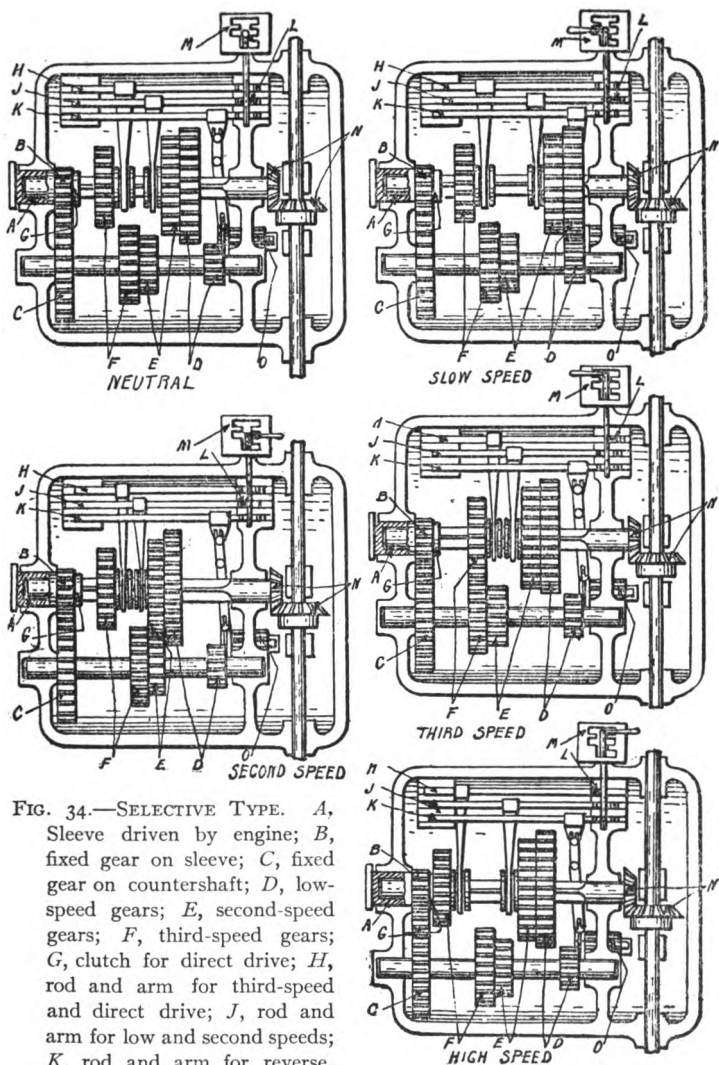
SELECTIVE TYPE. A, Sleeve driven by engine; B, fixed gear on sleeve; C, fixed gear on countershaft; D, low-speed gears; E, second-speed gears; F, third-speed gears; G, clutch for direct drive; H, rod and arm for third-speed and direct drive; J, rod and arm for low and second speeds; K, rod and arm for reverse; L, rocking-shaft finger in groove; M, guide plate and control lever; N, bevel gears on square shaft and jack shaft; O, idler gear for reverse.
